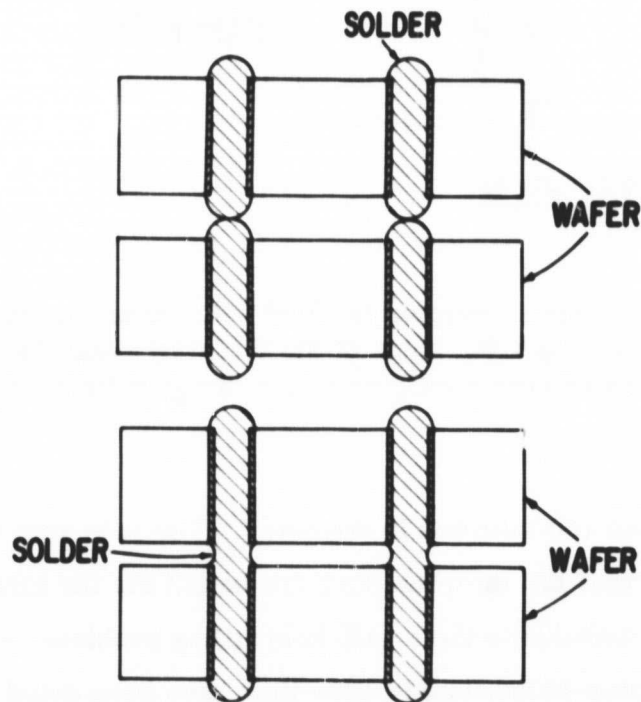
A schematic diagram of a method of forming an electrically-connected stacked array of SOS wafers with hollow, solder-filled feedthroughs by a brief remelt of abutting solder bumps.
